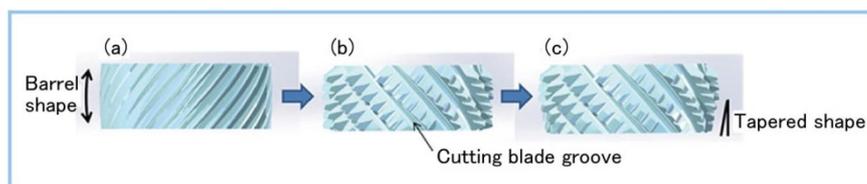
Barrel-shaped grinding wheel and super skiving cutter
